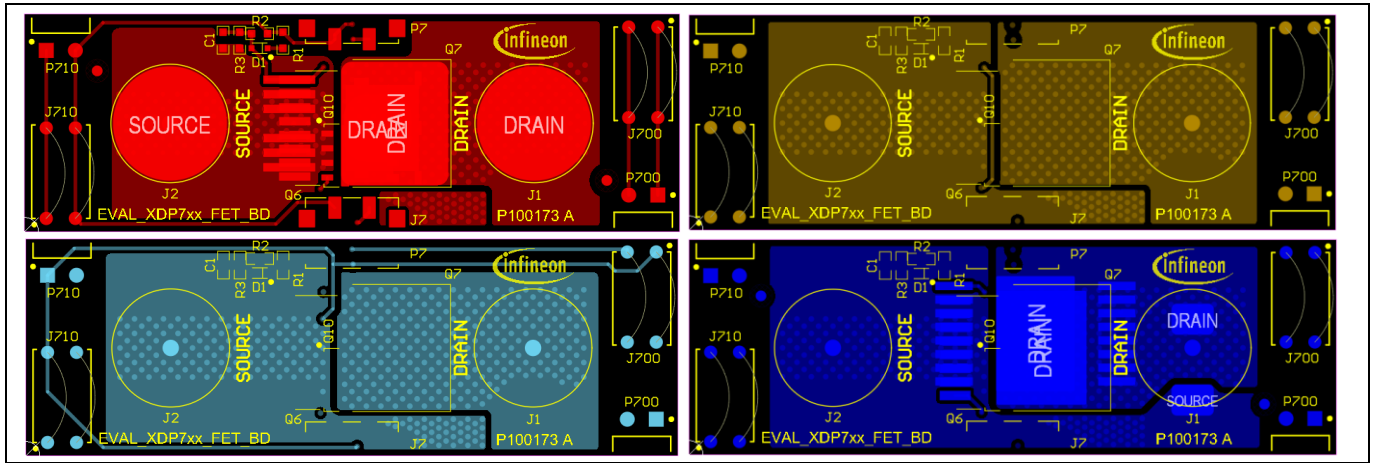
Top, mid 1, mid 2, and bottom layer layouts of MOSFET PCB
